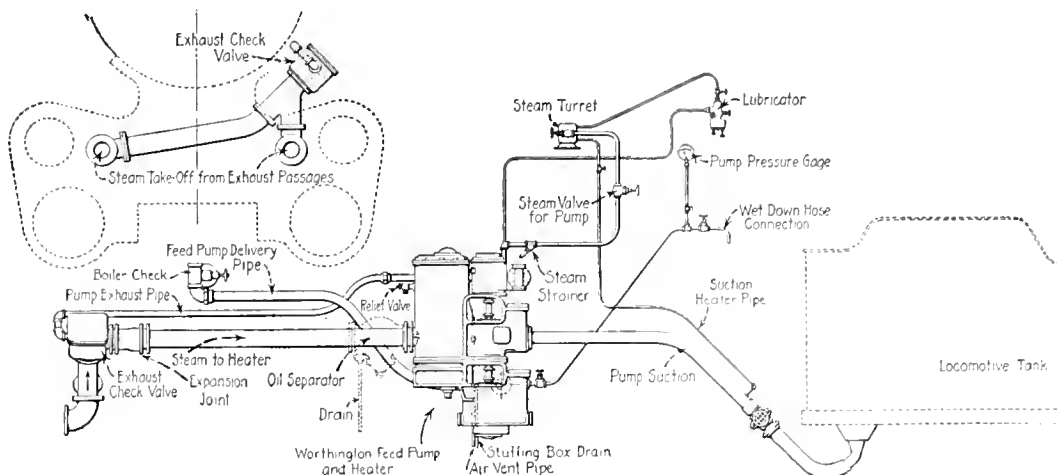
Piping Diagram Showing General Layout of a Typical Application of Worthington Heater
